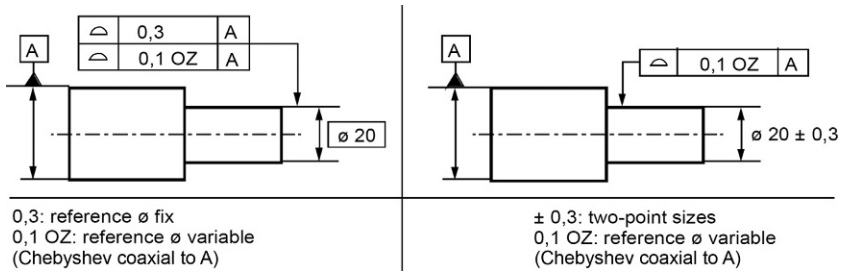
Profile surface tolerances for location for cylindrical surfaces
